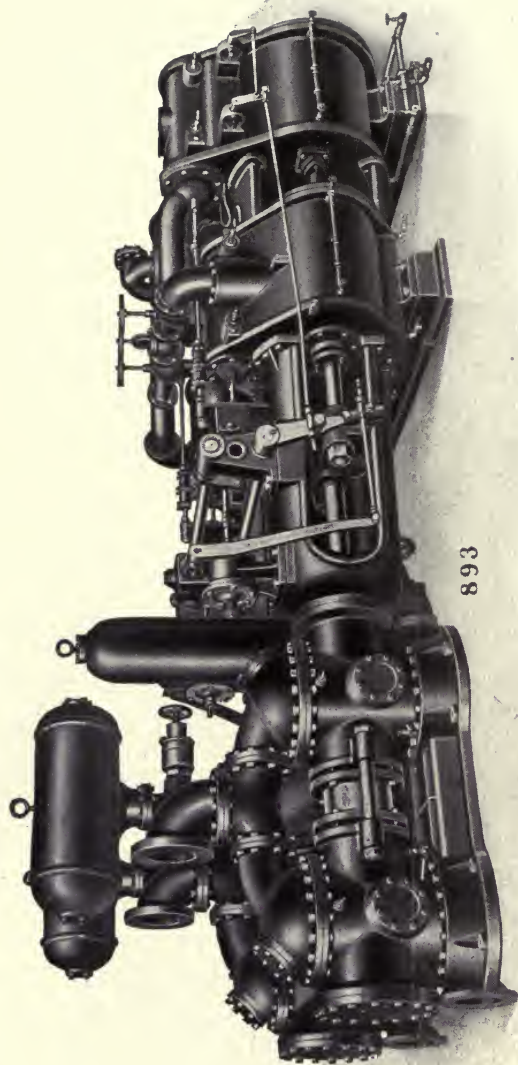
Platt Iron Works Co. Cross Triple Direct Acting Pumping Engine.
